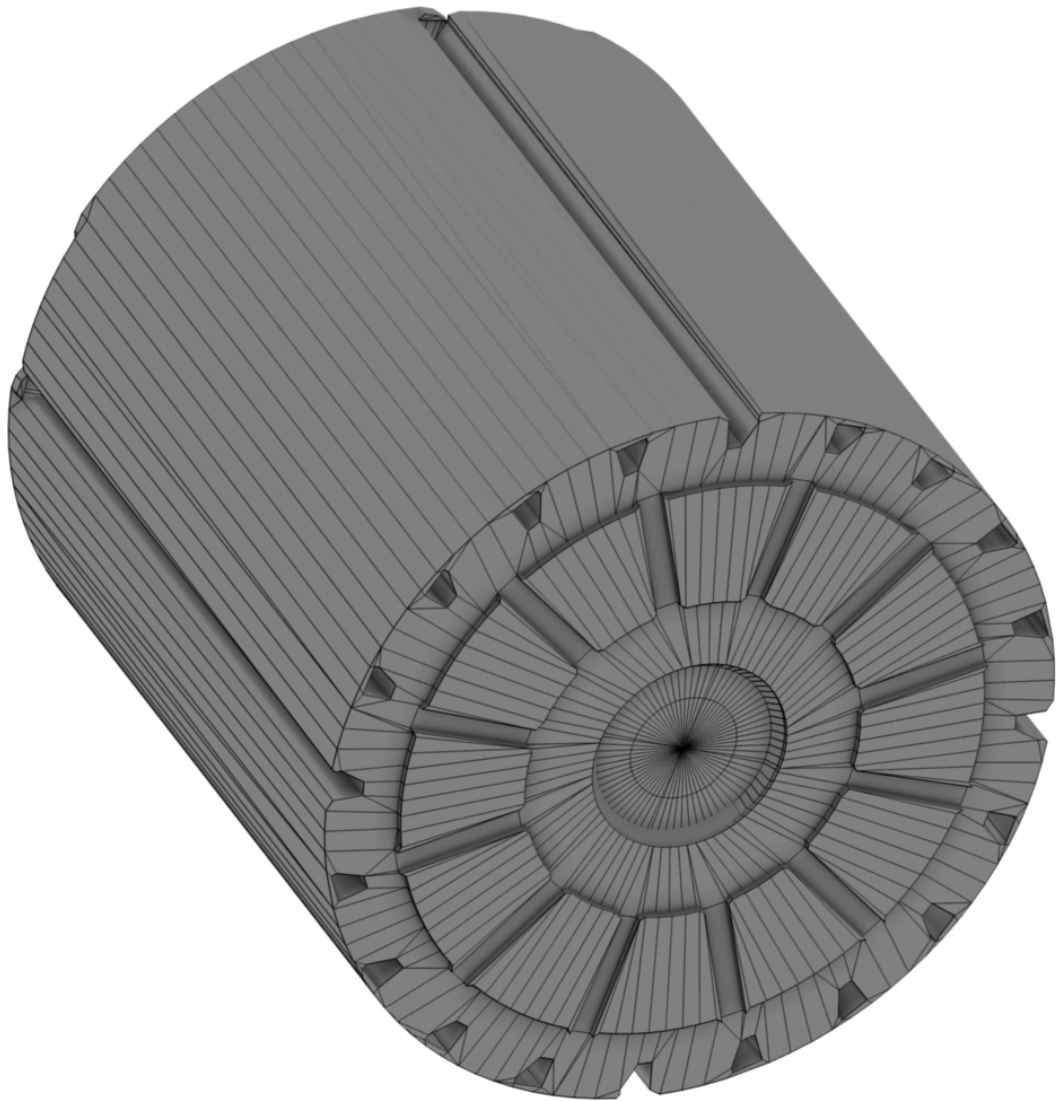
Isometric view of the discharge end of the 30 cm mill surface mesh
